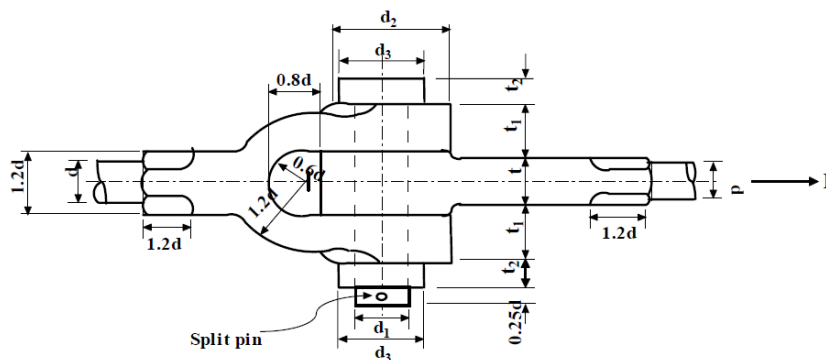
Schematic diagram of knuckle joint assembly showing dimension calculations^[2].
